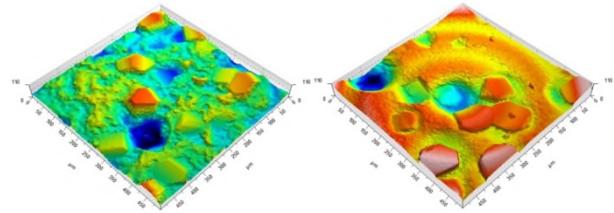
PECM-surface (left) and μ EDM-surface of machined Aluminium with Diamond
